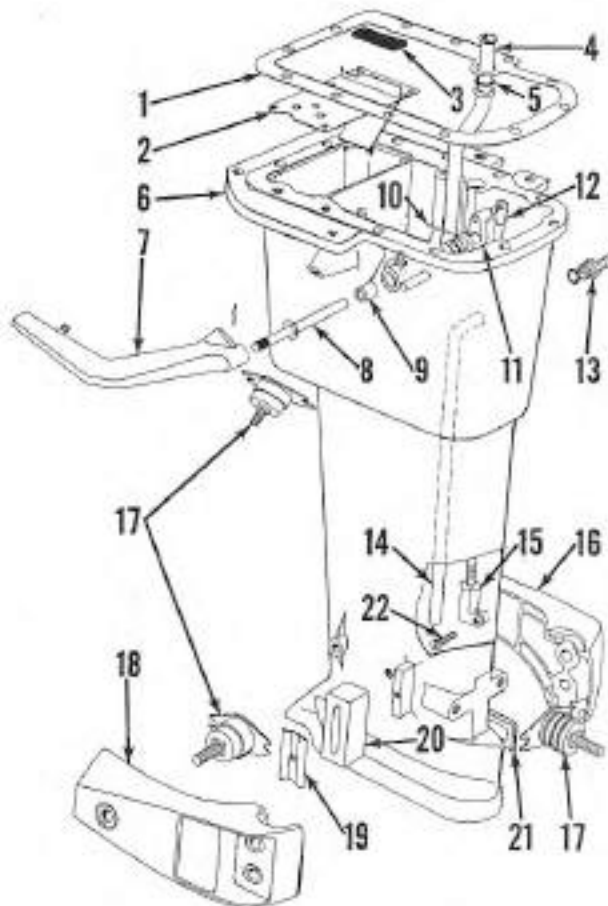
Exploded view of lower motor housing and associated parts.
